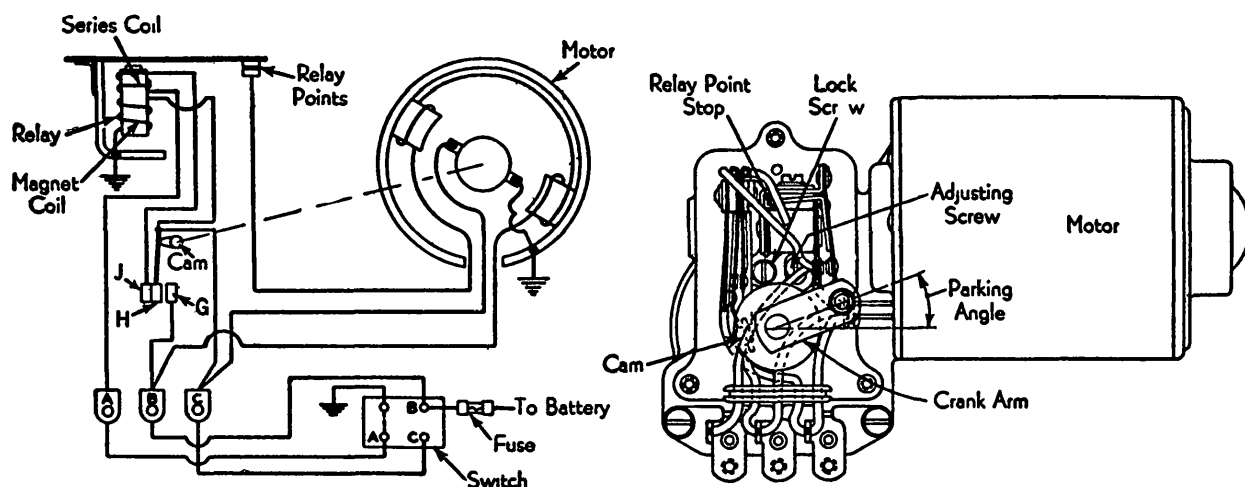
Auto-Lite Electric wiper. Wiring diagram shown at left; parking angle adjustment shown at right
